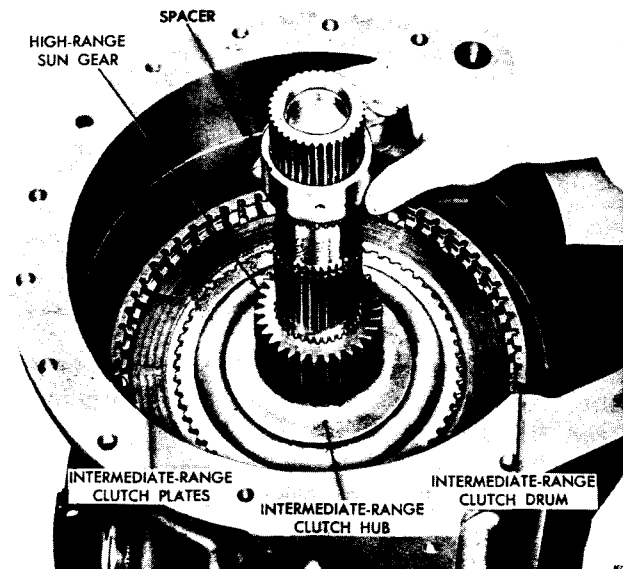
Installing spacer onto high-range sun gear ^{S2507}
